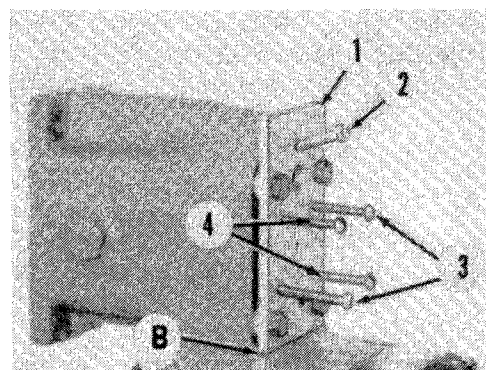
To adjust selective control valve, install JDH-15C adjusting cover (1) on control valve housing as shown. It may be necessary to grind some material from bottom of cover (B) to prevent interference with housing.
